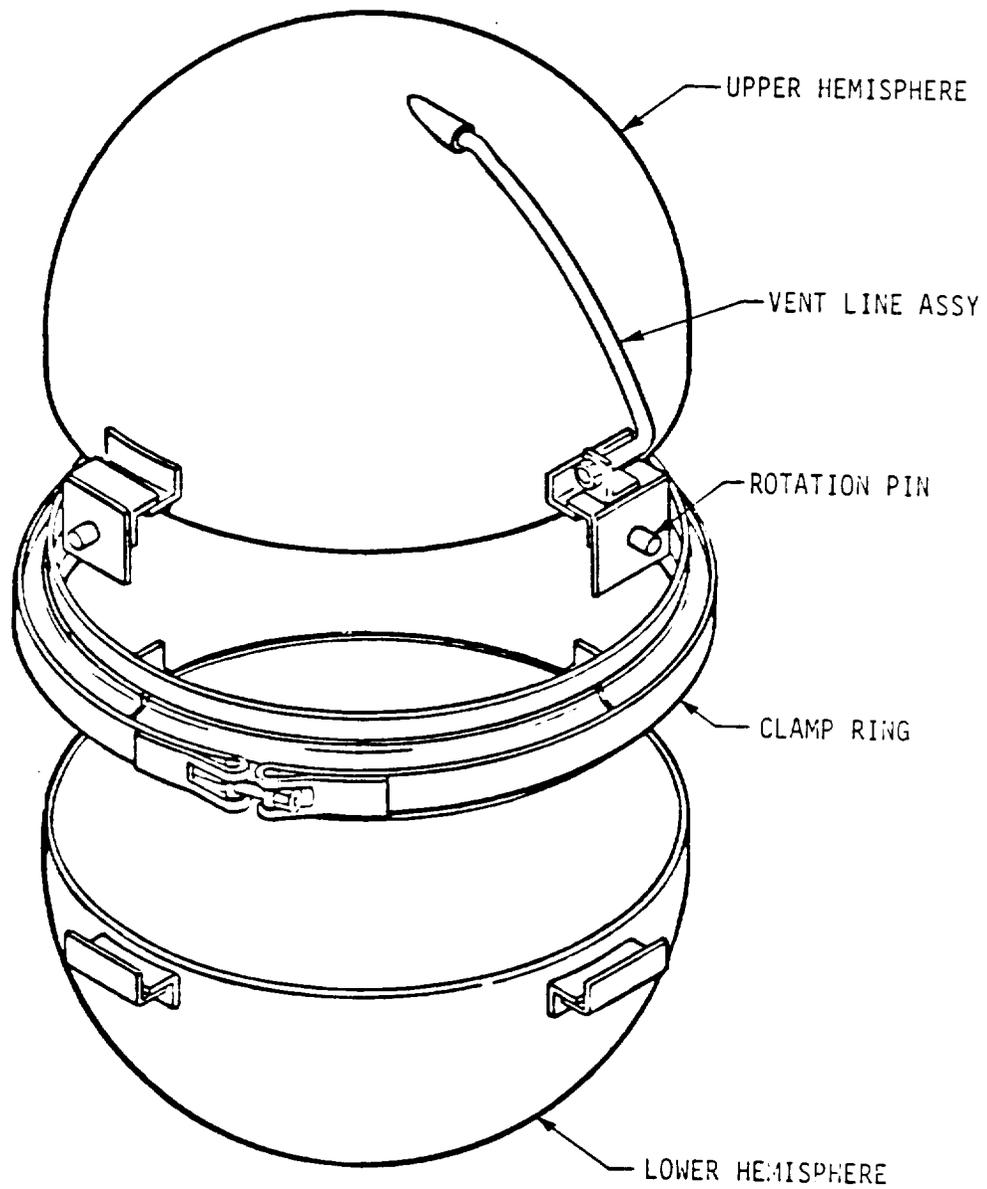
P/N 561438 PRESSURE VESSEL ASSEMBLY.
